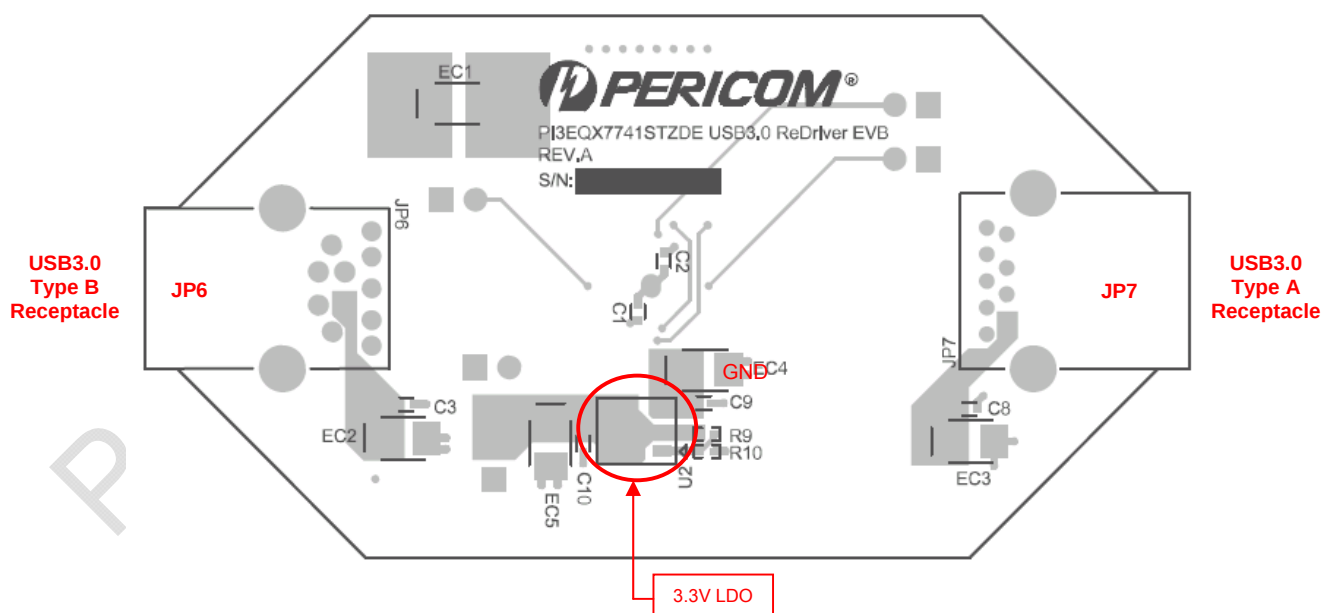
, Bottom view of PI3EQX7741ST EVB Layout
